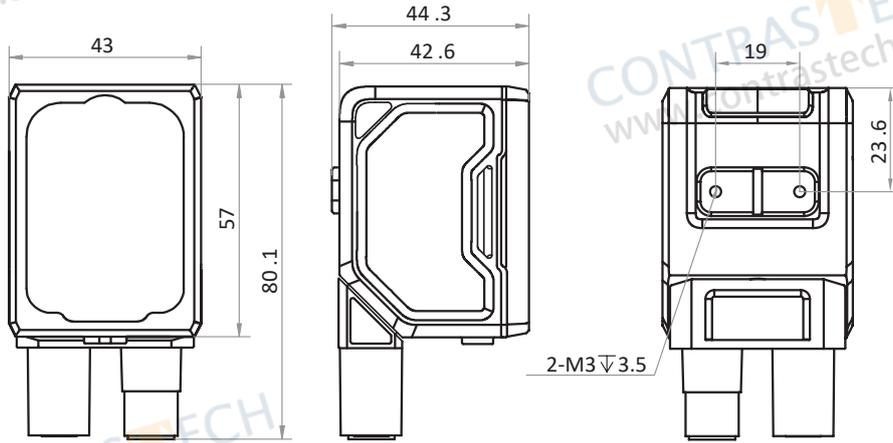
43 × 44.3 × 80.1 mm Mechanical Dimensions (in mm) of the code reader with M12-Monut housing (The installation uses M3 screws).
